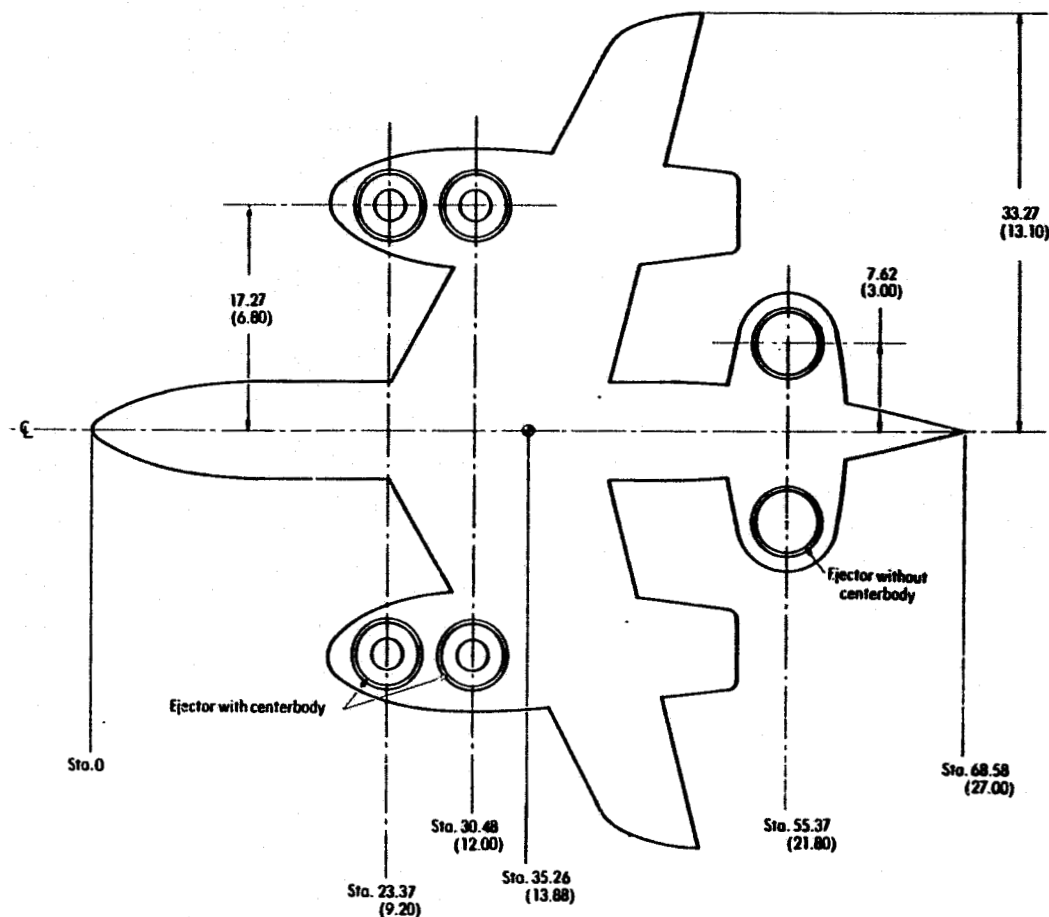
Dimensions of plate model 2 showing ejector arrangement. Plate is 0.318 (.125) thick. All dimensions are in cm (in.).
